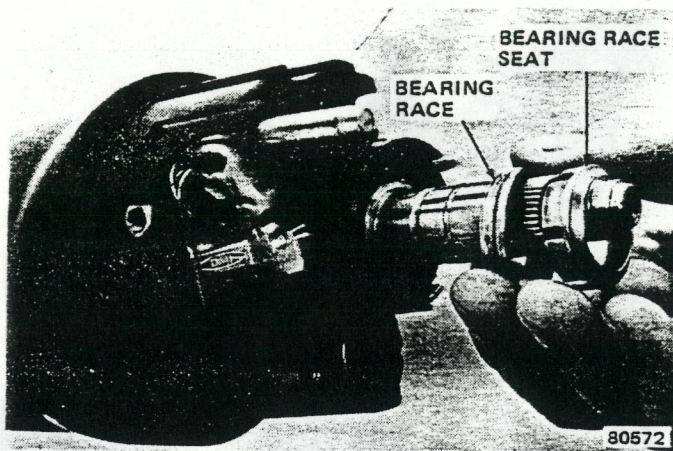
J-51 Upper Bearing Race and Seat Removal/Installation
